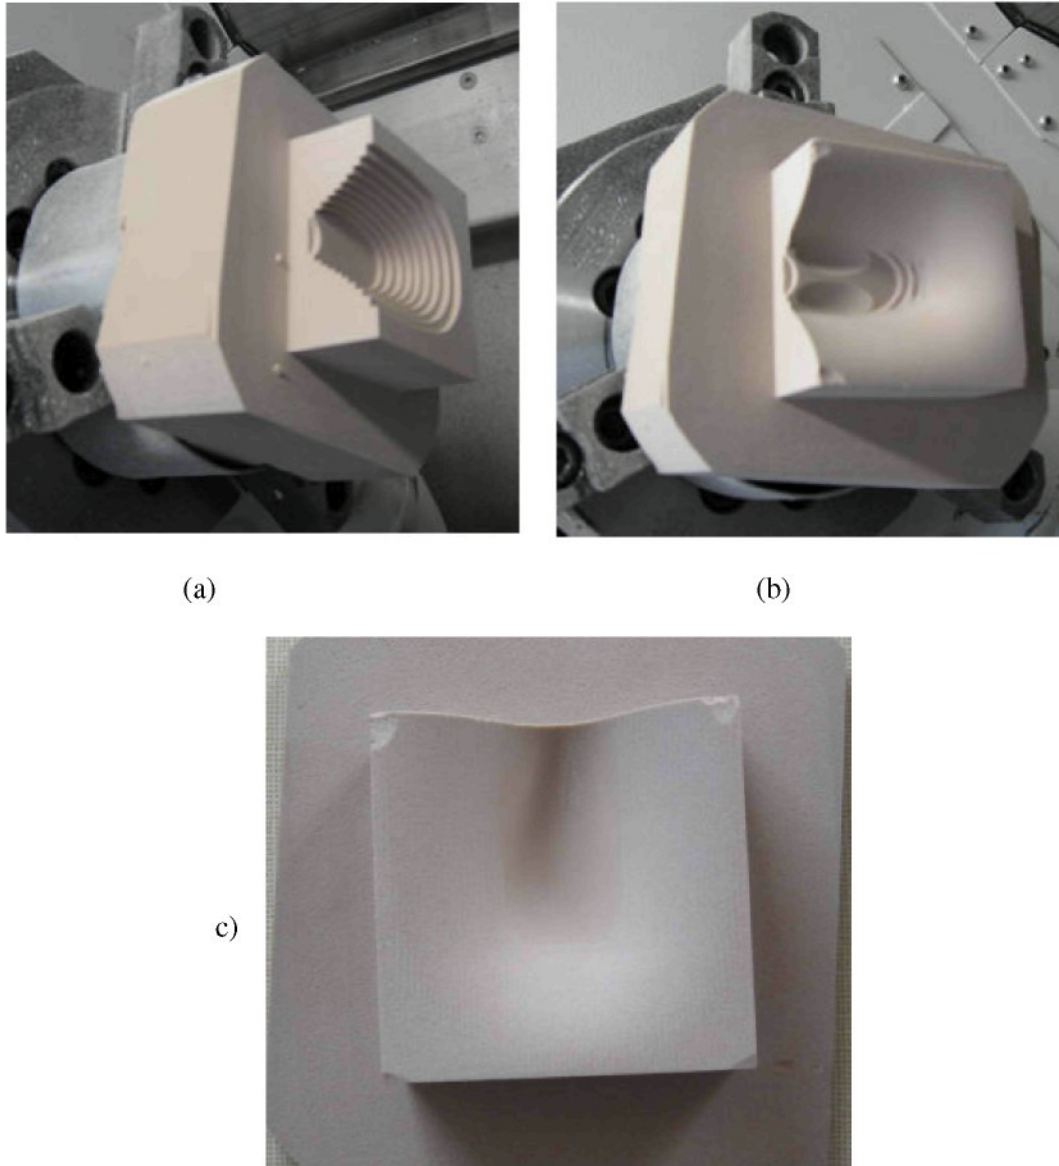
Machining sequences of the surface (application 1): (a) part after the roughing cut; (b) part after the finishing cut for the saddle region; (c) final part
